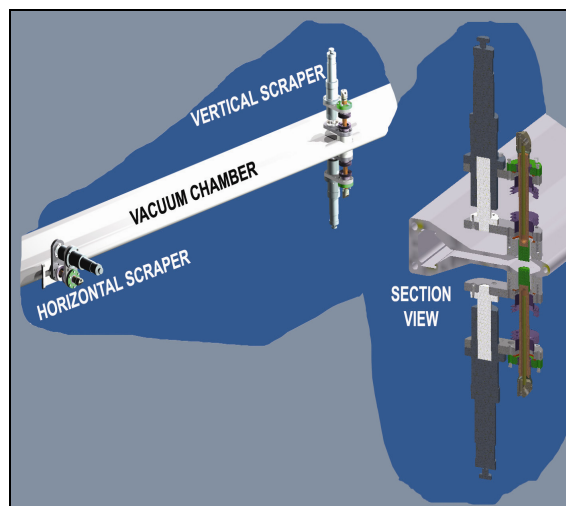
(top right) Sectional view of APS scraper assembly, blades partially opened.
